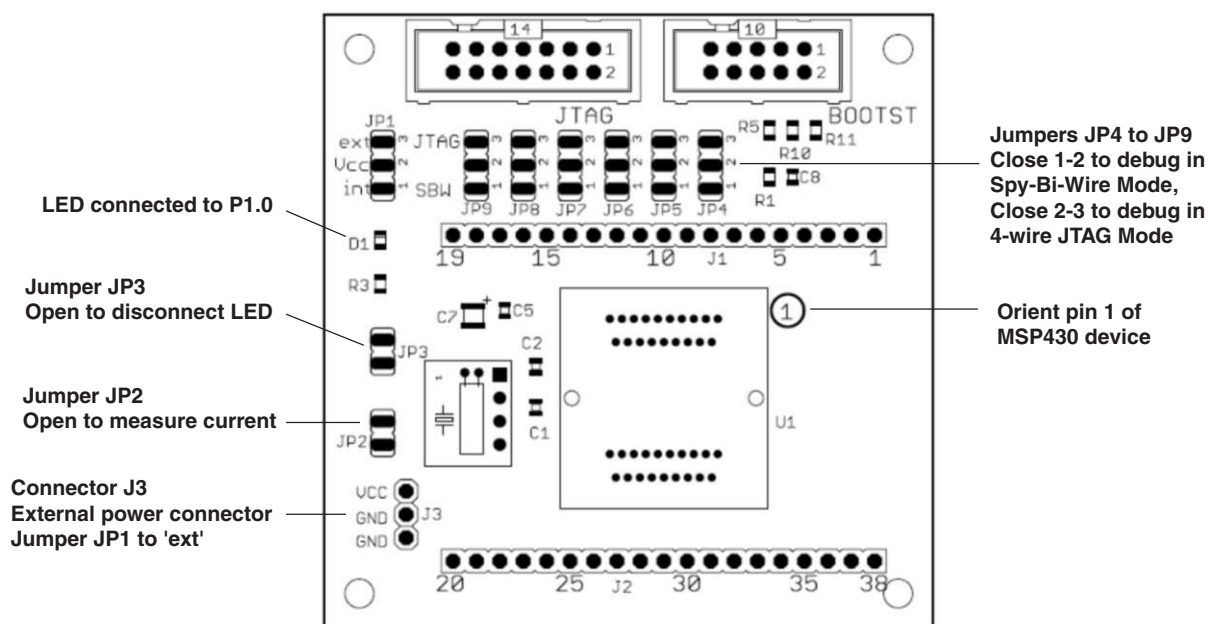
MSP-TS430DA38 Target Socket Module, PCB
